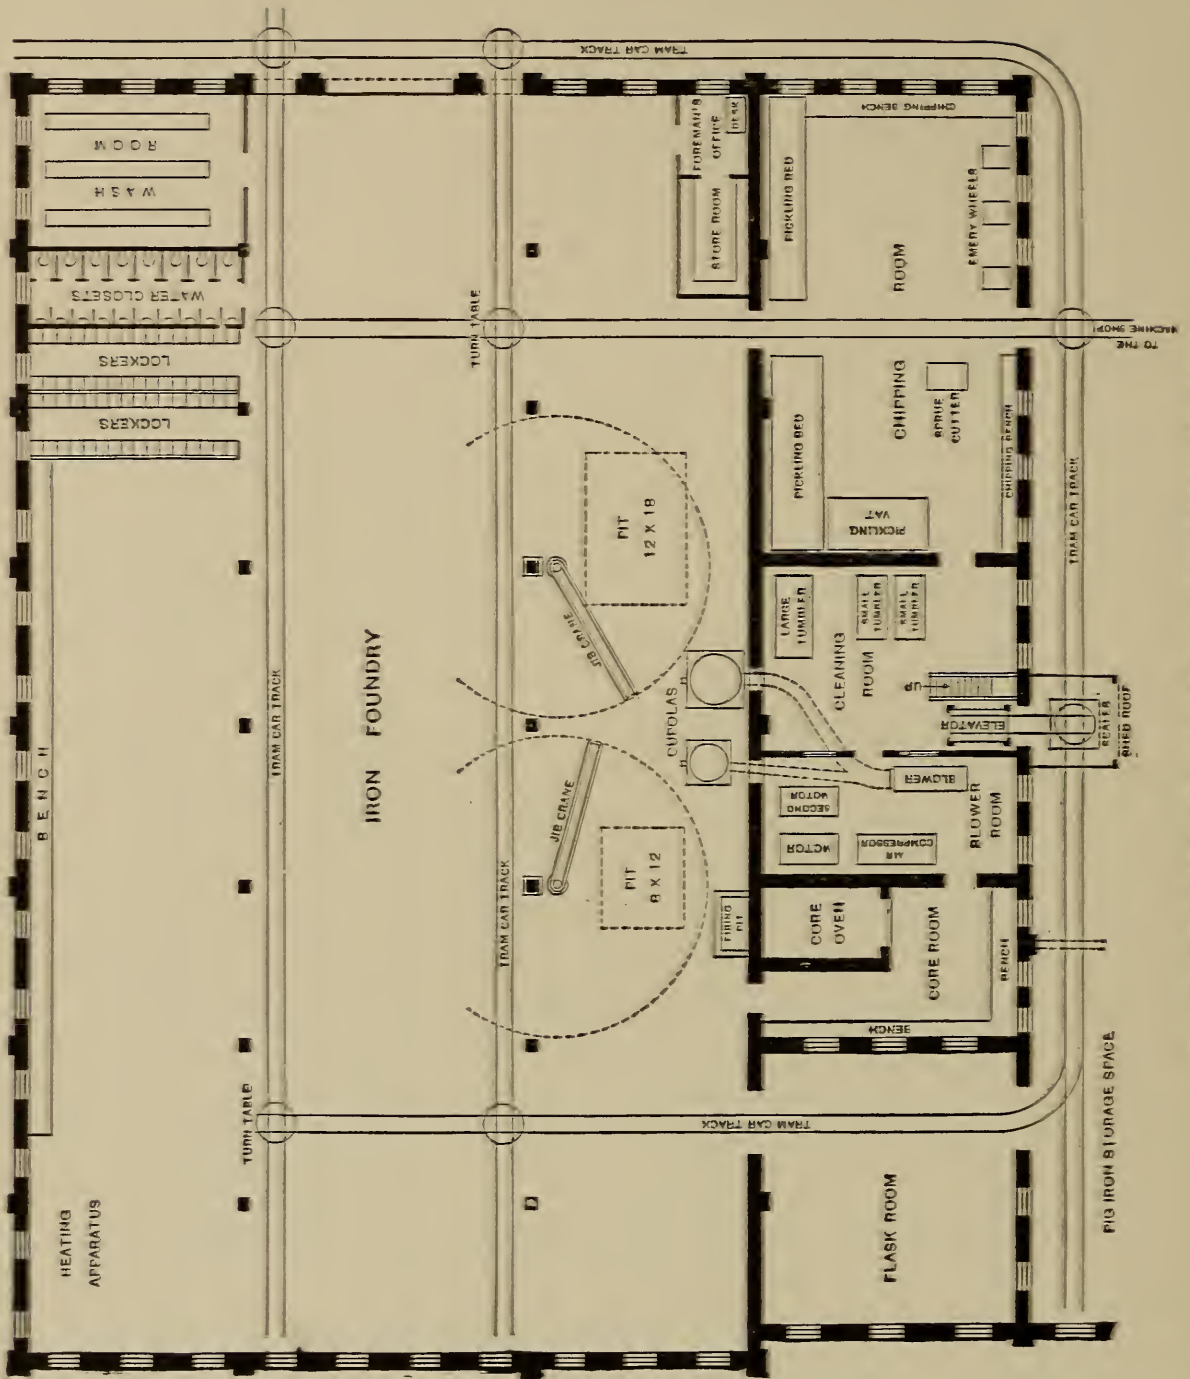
Plan of Foundry, showing General Arrangement and Equipment.
